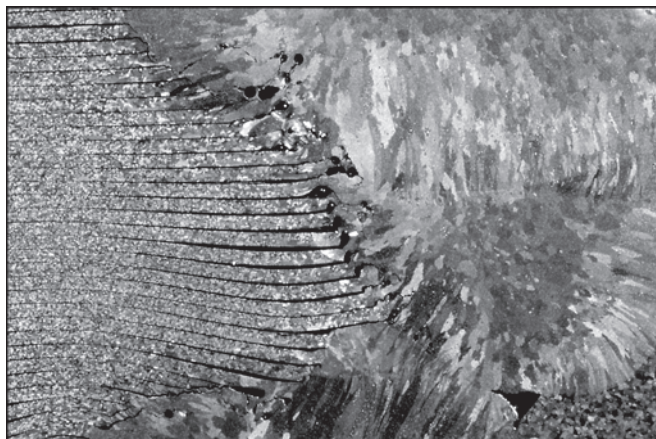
Macrostructure of the MIG welded joint (detail)
